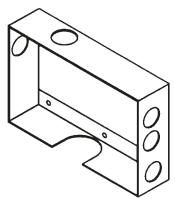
Model MB-P2 - Control Head Mounting Bracket.
